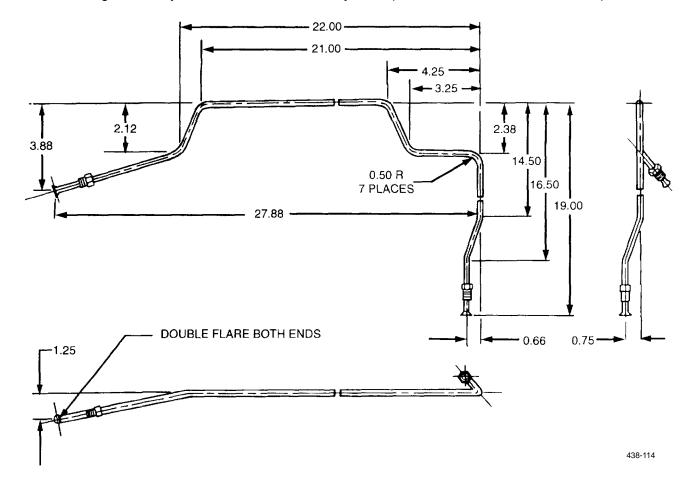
Hydraulic Brake Tube Assembly, Rear (M101A3, M116A2E1, and M116A3)
